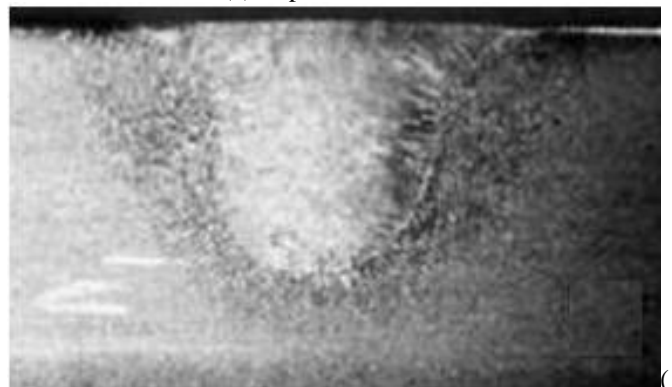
Photographic view of bead on plate GTAW weld
